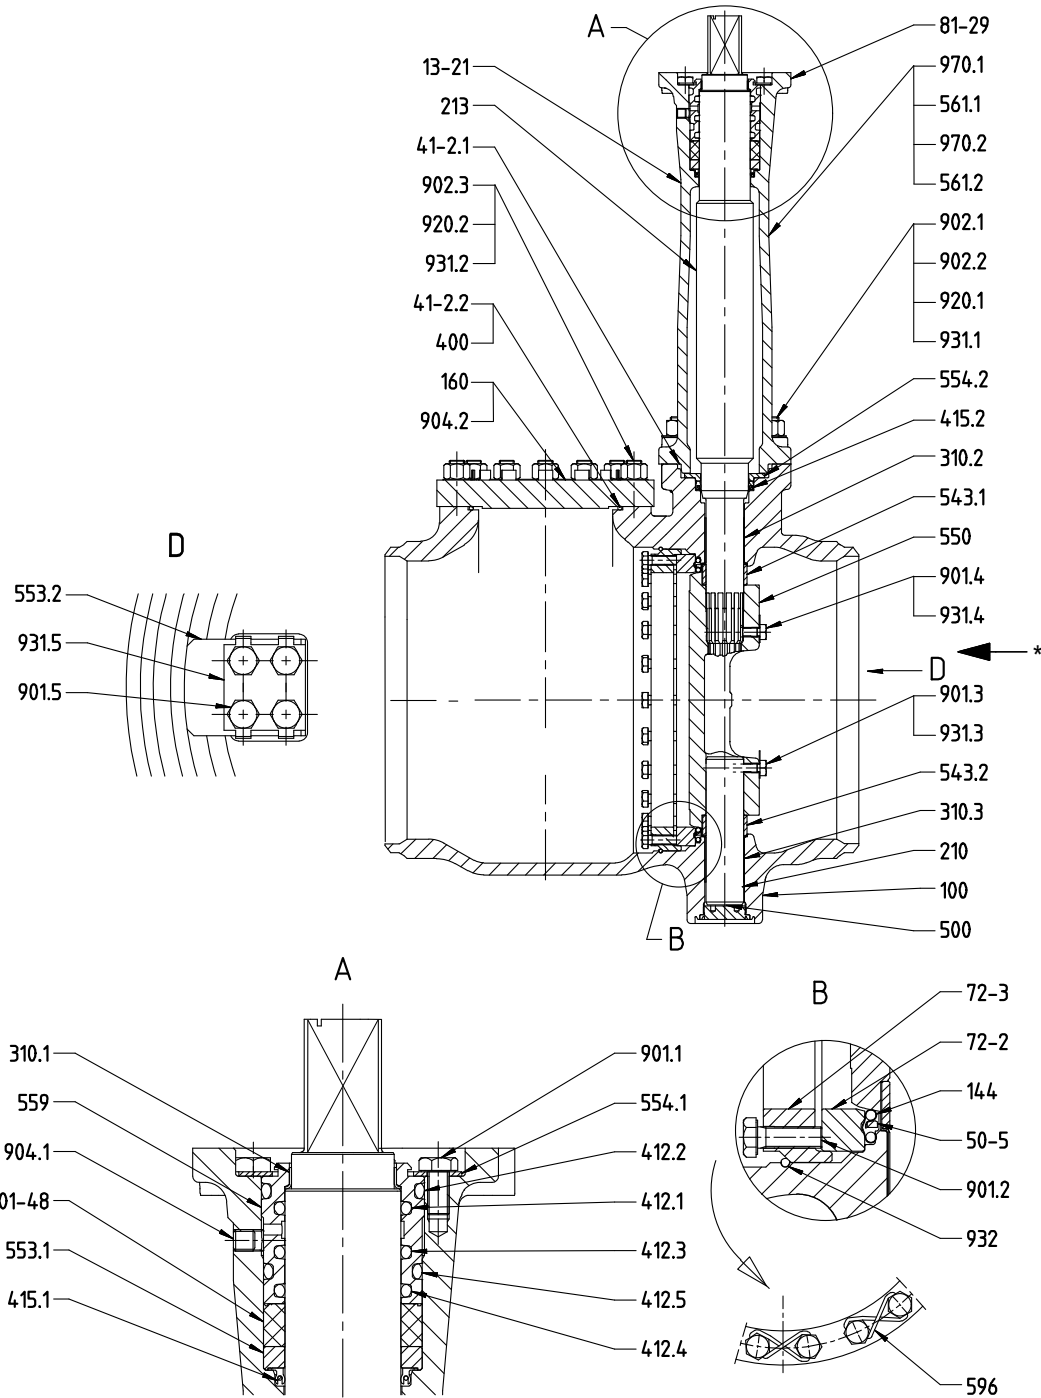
Sectional drawing of DANAIS CRYO BW - DN 300-600 (12-24 in.)
